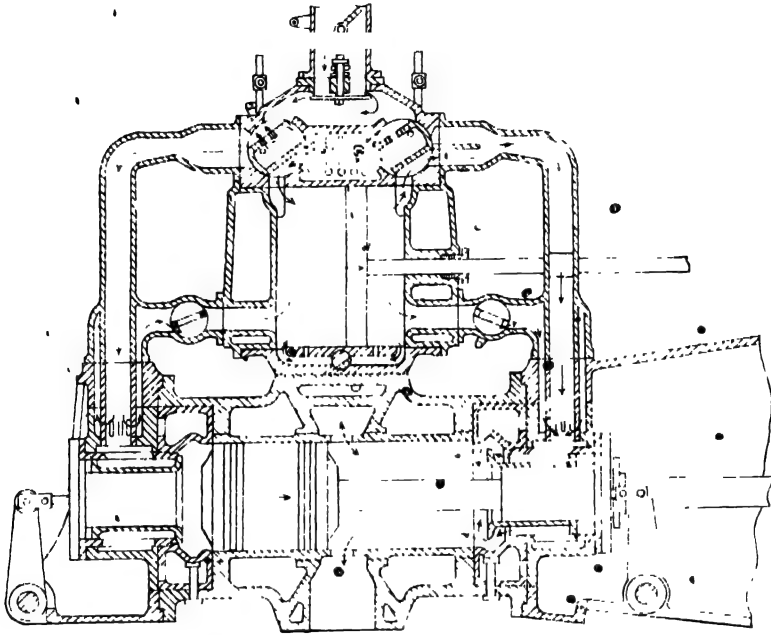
Diagram of Scavenging and Charging Pump of Illmer Gas-engine.
